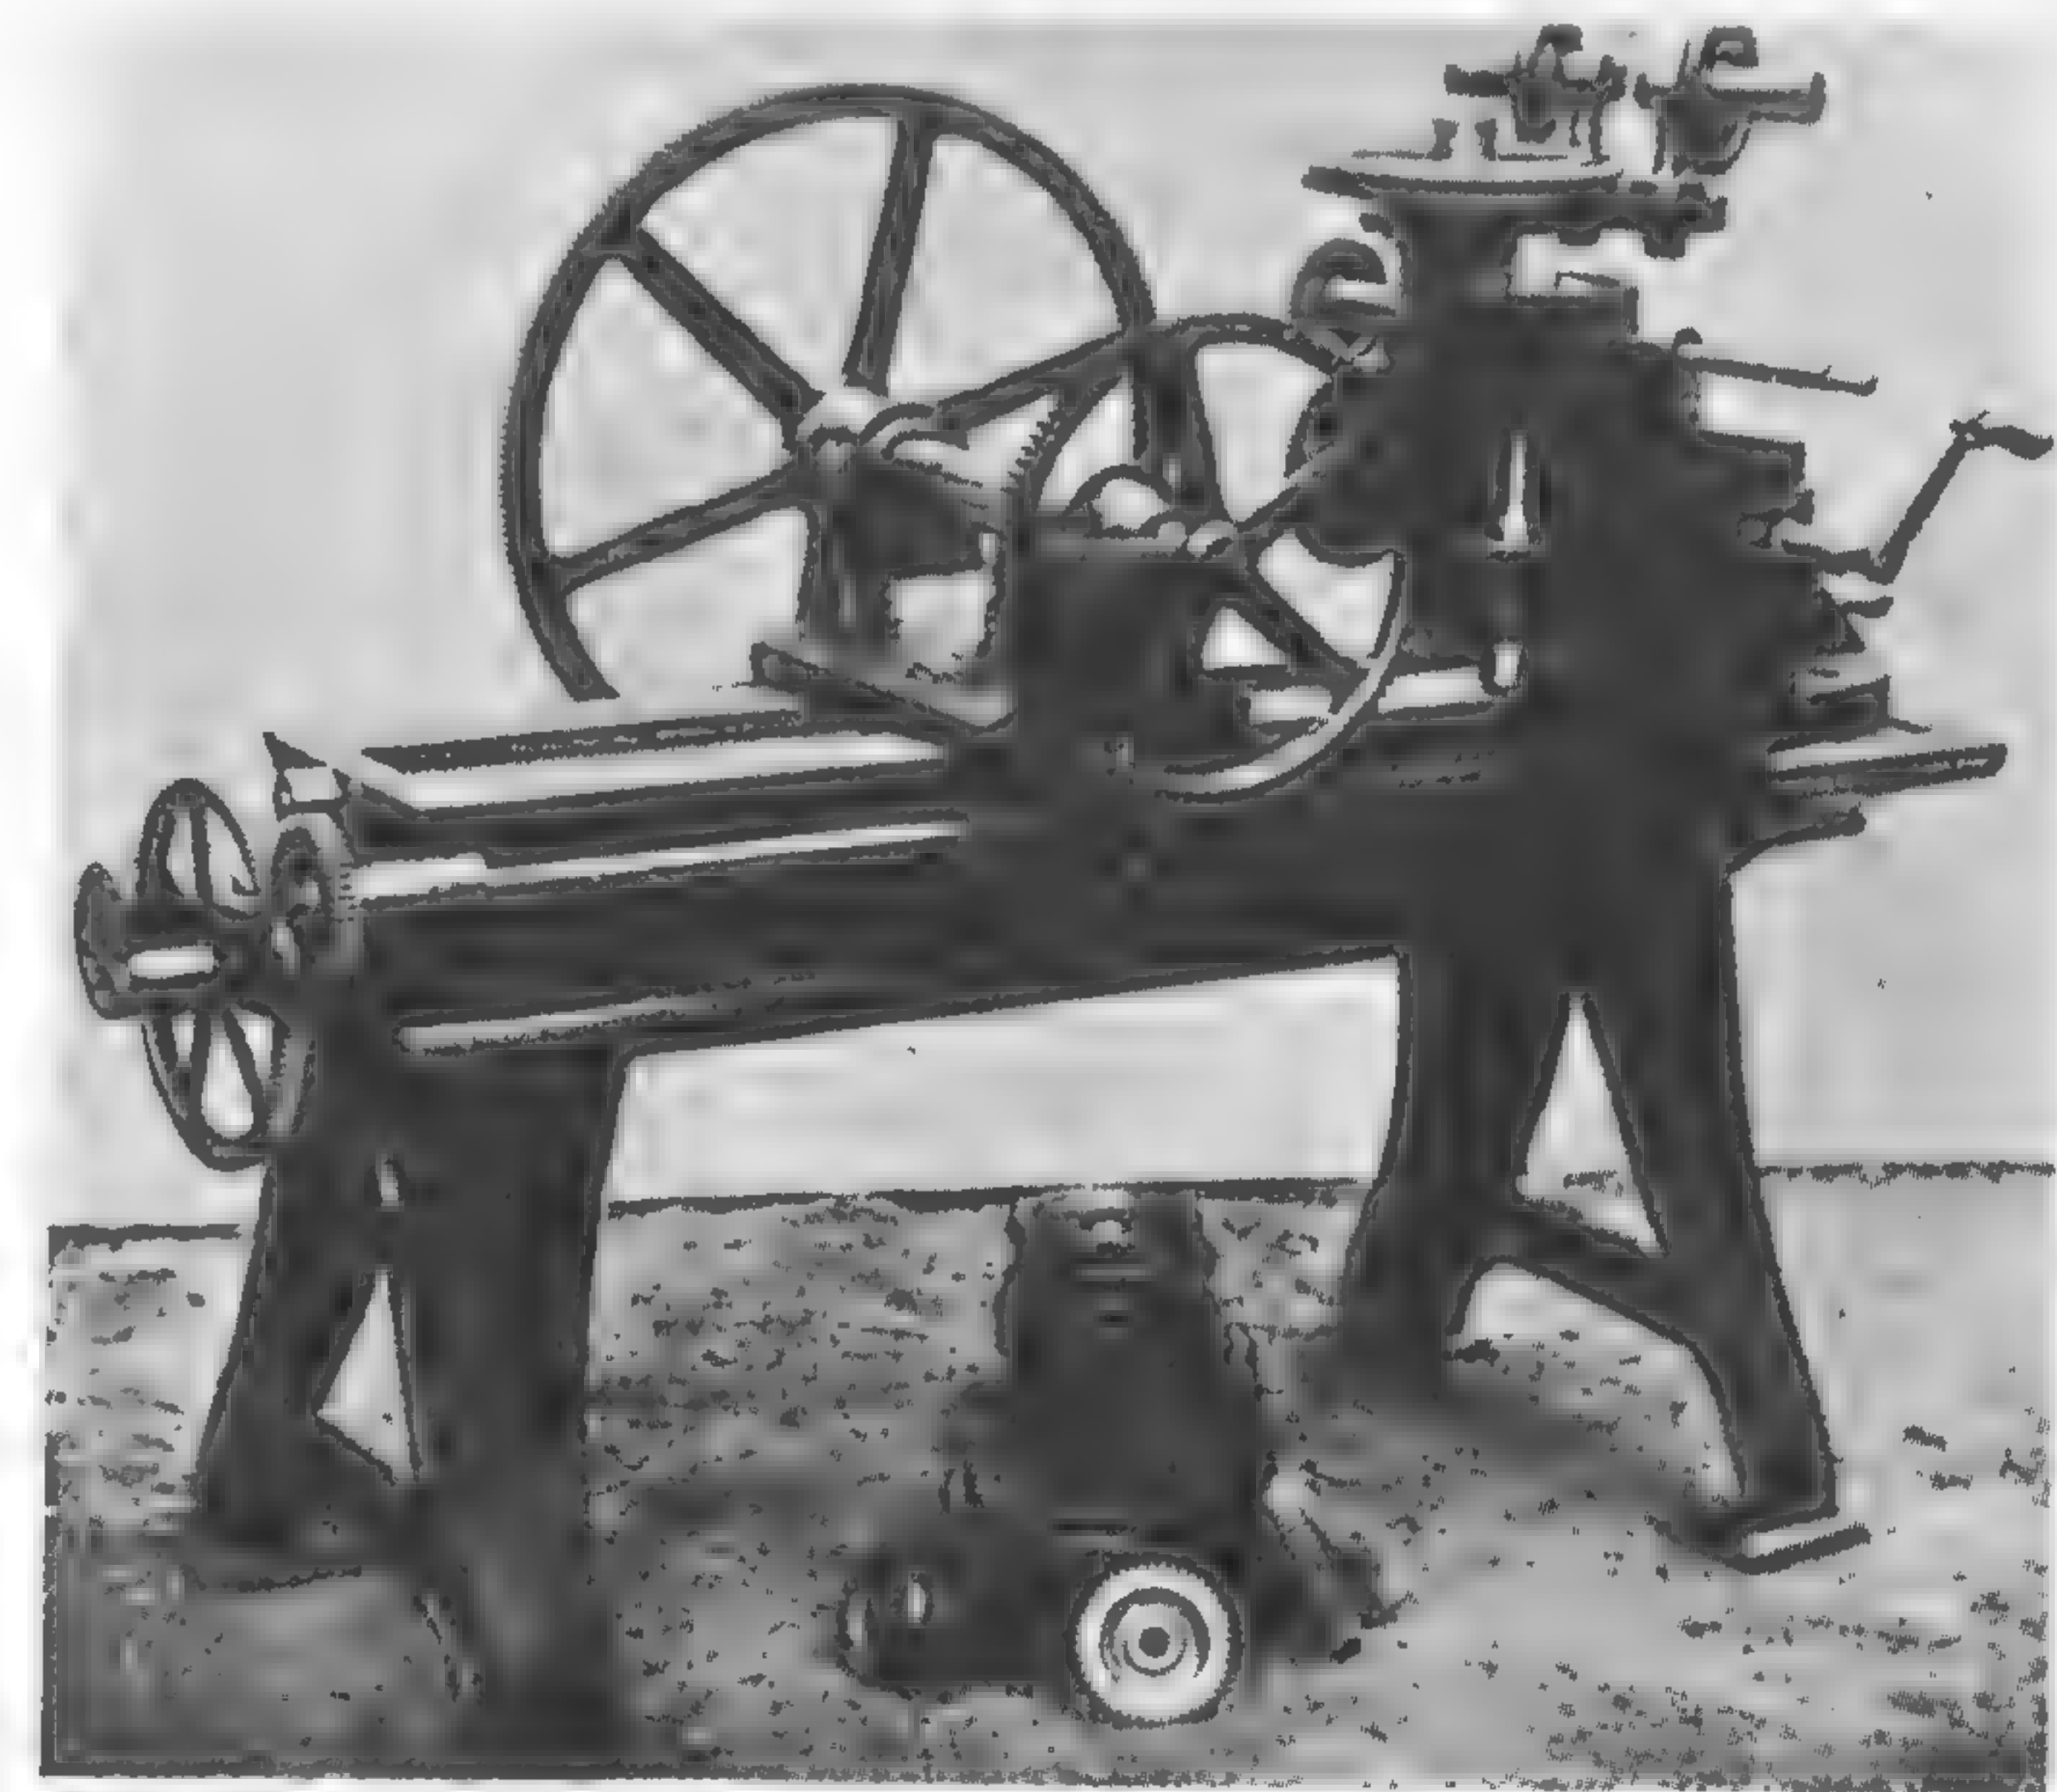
SHEPHERD, HILL AND SPINK MACHINE, 1851
